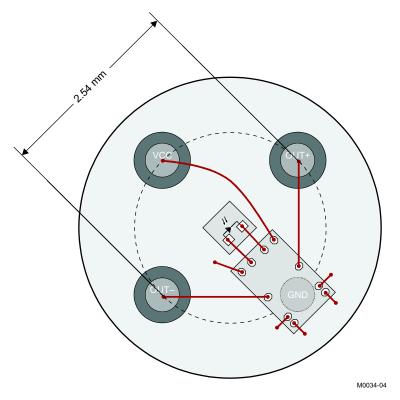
TO46 4-Pin Layout Example Using the ONET4291TA
